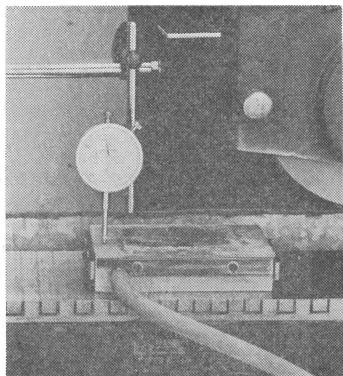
Measuring of thickness of thin section by the dial gauge attached to the grinding machine.
